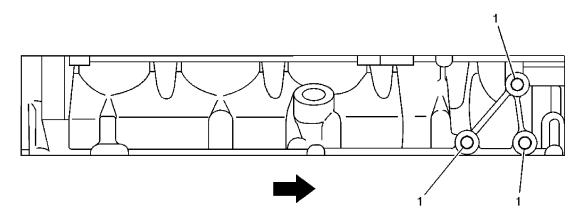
Identifying Bolt Size & Locations On Lower Crankcase - Bottom Courtesy of GENERAL MOTORS CORP.
